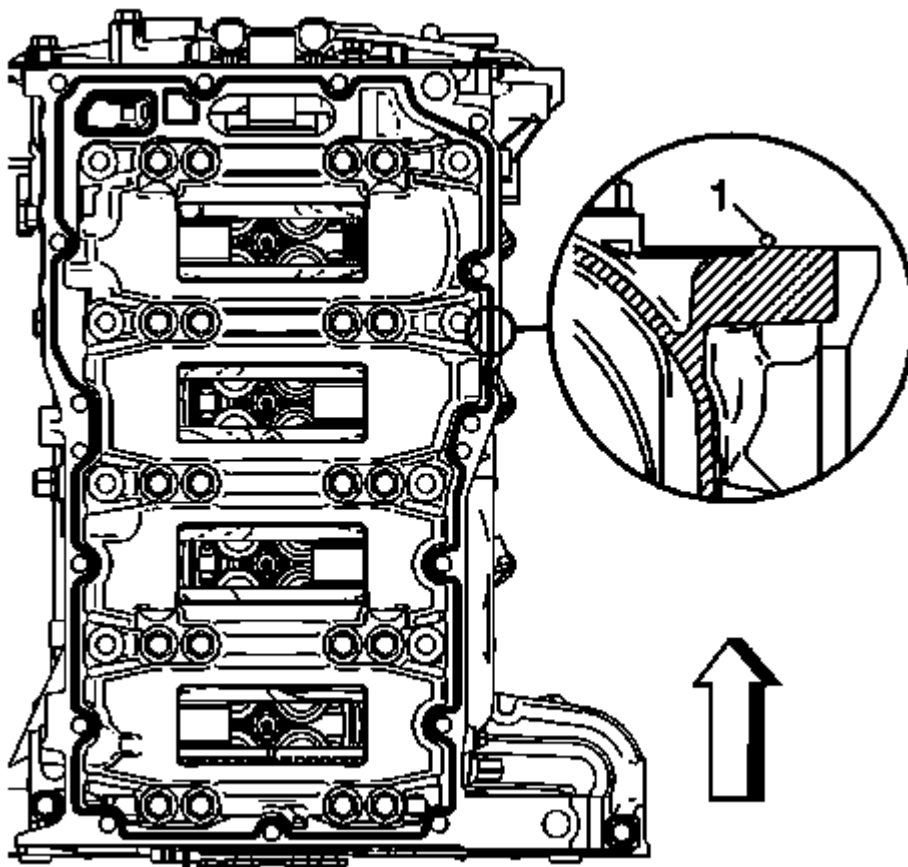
Apply 2.25mm Bead Of Sealer On Level Part Of Flange
